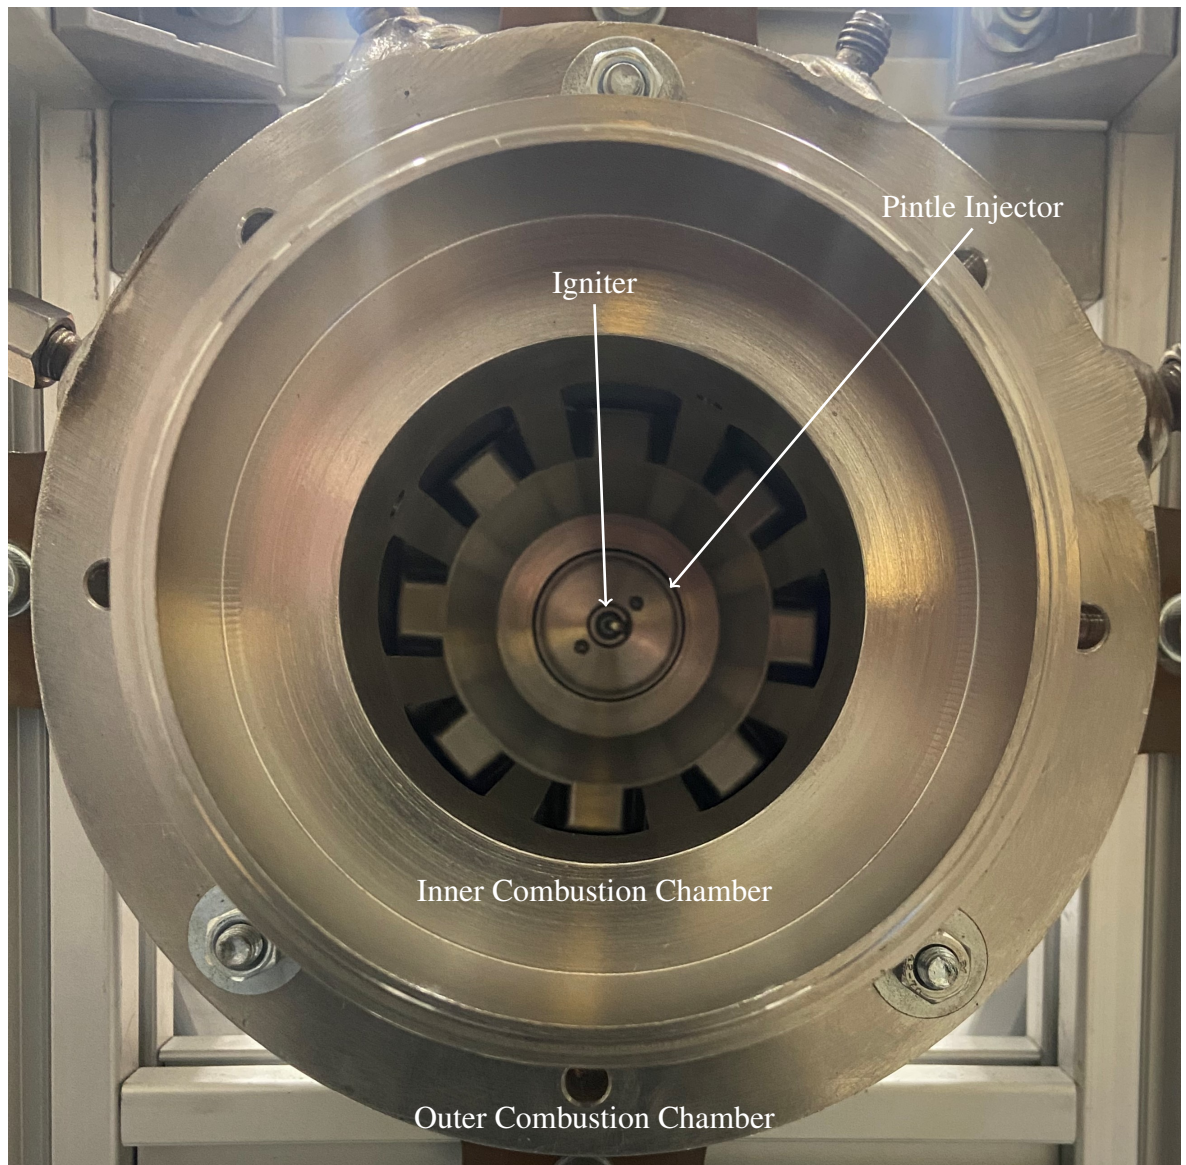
Ouroboros-2 integrated inner and outer combustion chamber assemblies.
